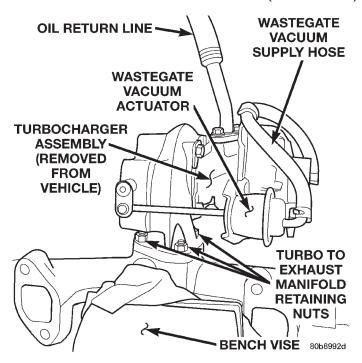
Turbocharger / Exhaust Manifold Assembly
